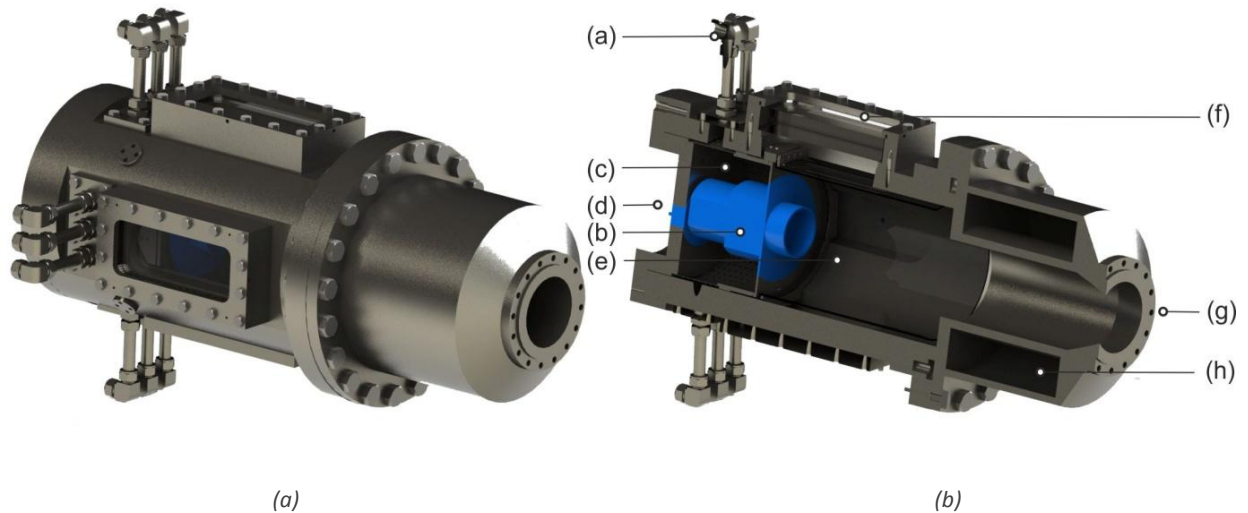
(a) External and (b) sectioned views of the HPOC assembly with development burner
